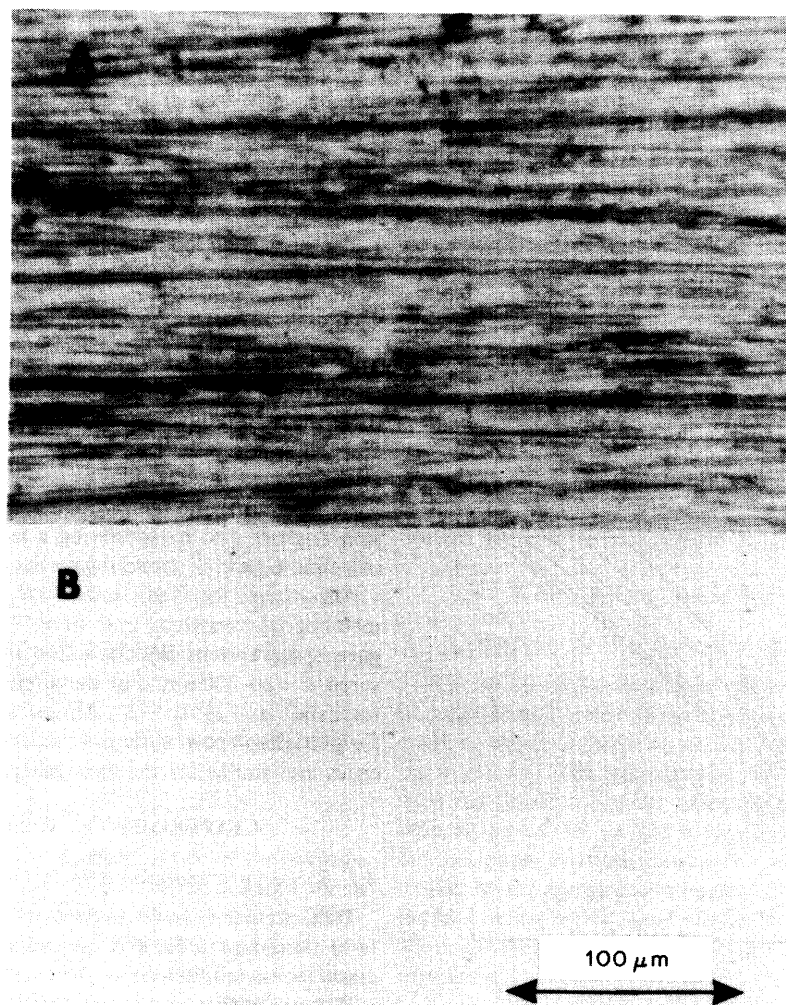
Surfaces prior to bonding: (a) as-milled and (b) mechanically polished.
